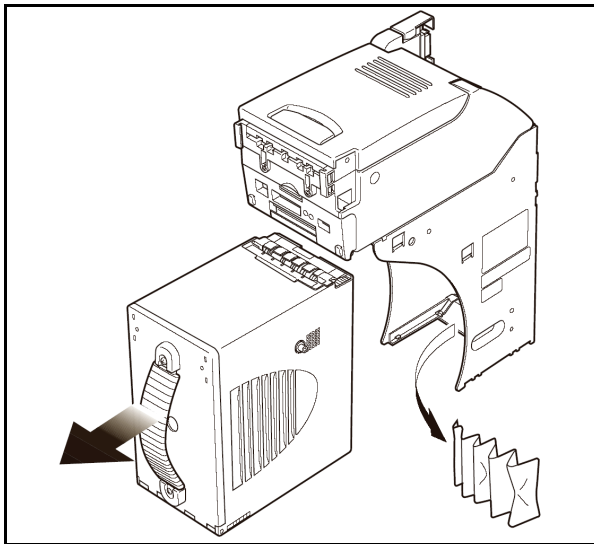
Clearing Cash Box Entrance Bill Jams
